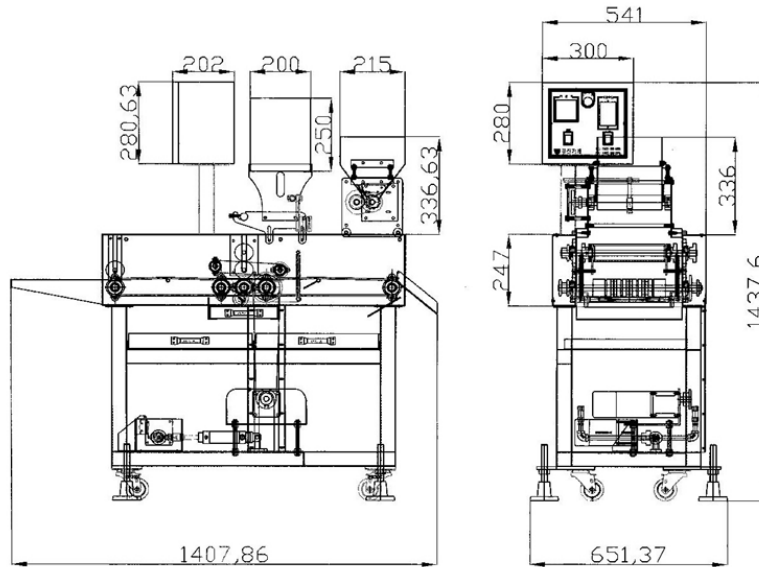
Design of developed pasting&garnishing machine for kimbugaks (unit: mm).
